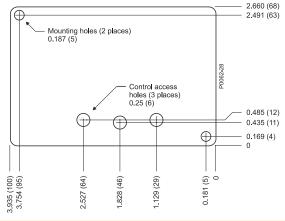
BE300PM Panel Drilling and Mounting Dimensions in Inches (Millimeters)
